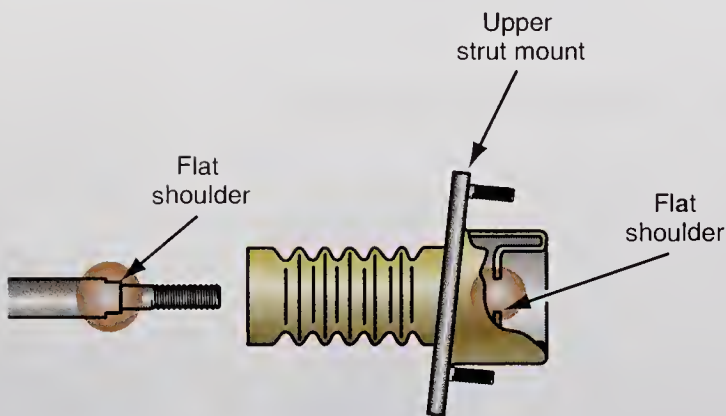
Upper strut mount properly positioned on strut piston rod.
